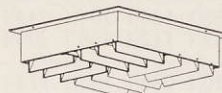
Four-Way Louver Assembly (Adjustable)
